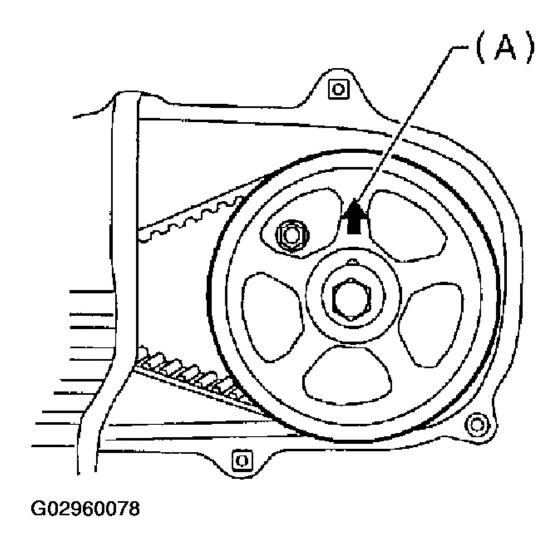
Identifying Arrow Mark On Camshaft Sprocket (LH) Courtesy of SUBARU OF AMERICA, INC.
